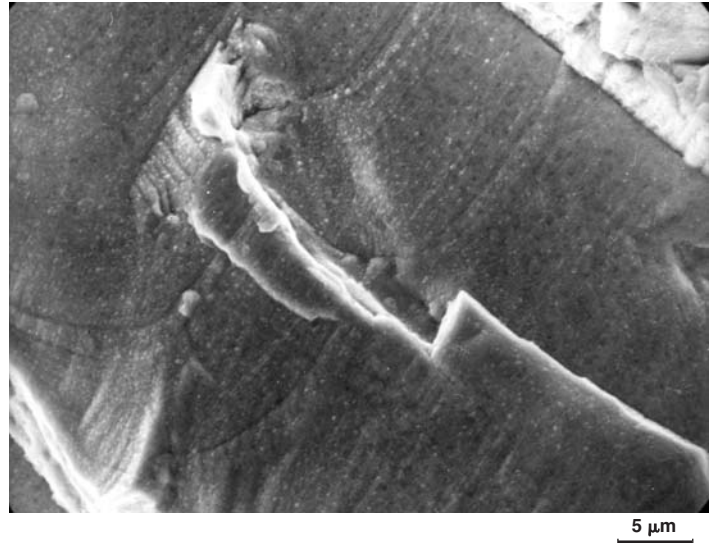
SEM fractograph of the failed blade, showing fatigue striations
